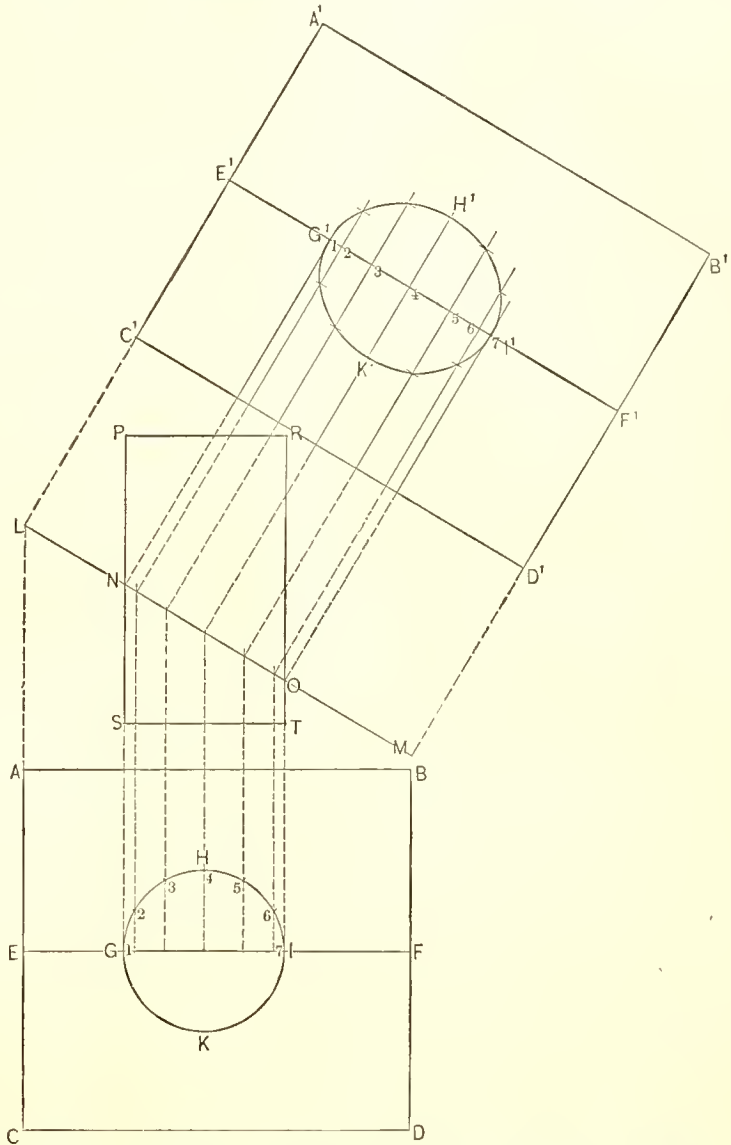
The Pattern of a Flange to Fit Around a Pipe and Against a Roof of One Inclination.
